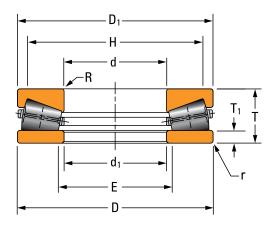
Type TTHDFL thrust tapered roller bearing assembly.
